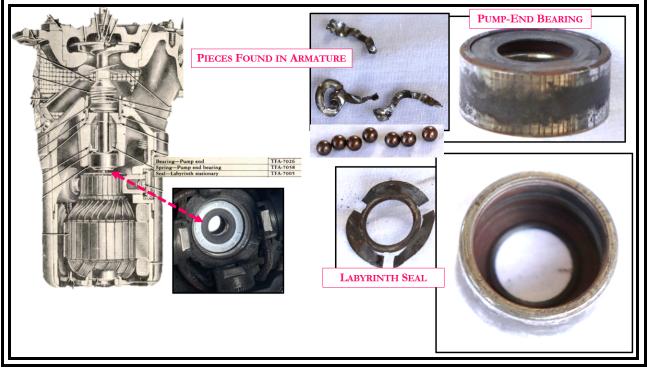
Pump-End Bearing and Fragments Inside the Pump
